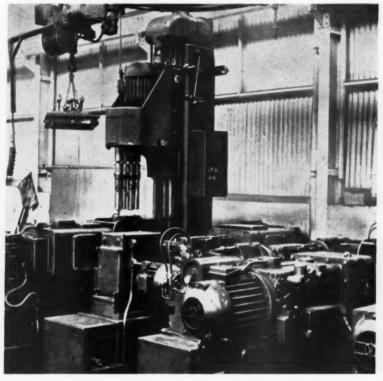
Four-spindle boring head for chamfering the cylinder bores, top and bottom
